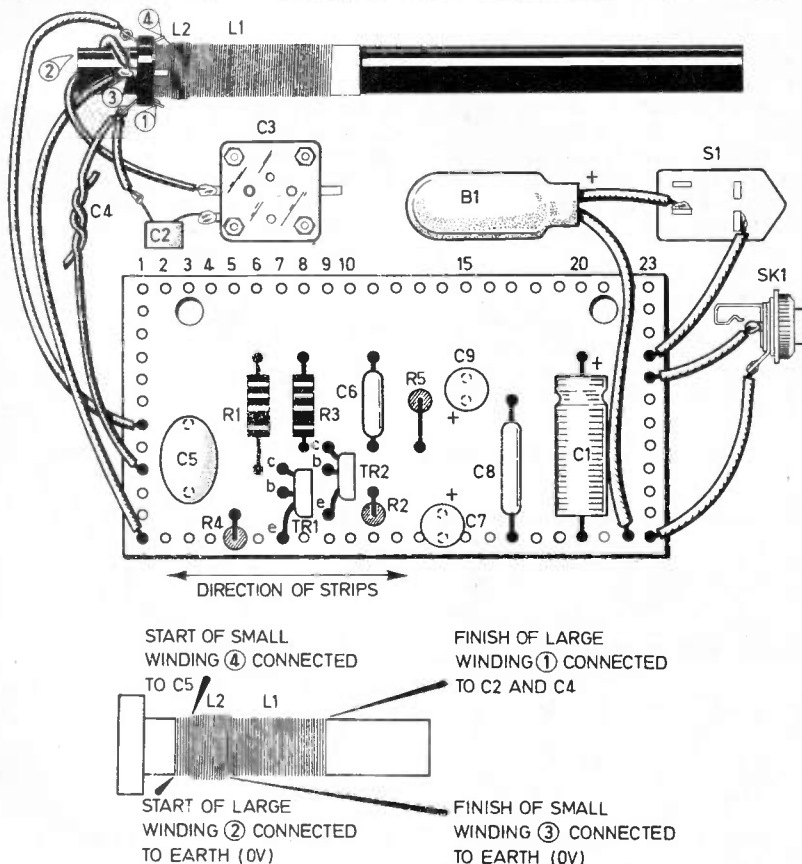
Layout of component board with complete interwiring details of the off-board components.
